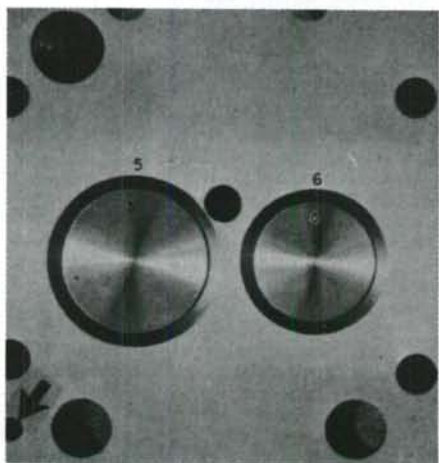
View of diesel cylinder head showing valves and valve numbers. Arrow indicates oil pressure passage to rocker arms.
